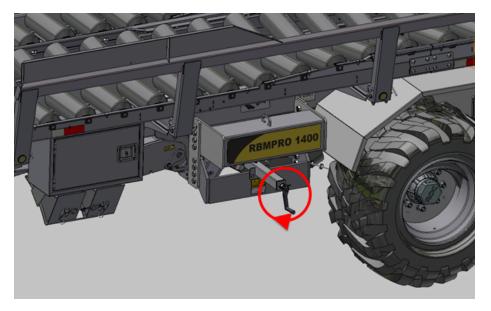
Engaging the RBMPRO 1400 Handbrake
